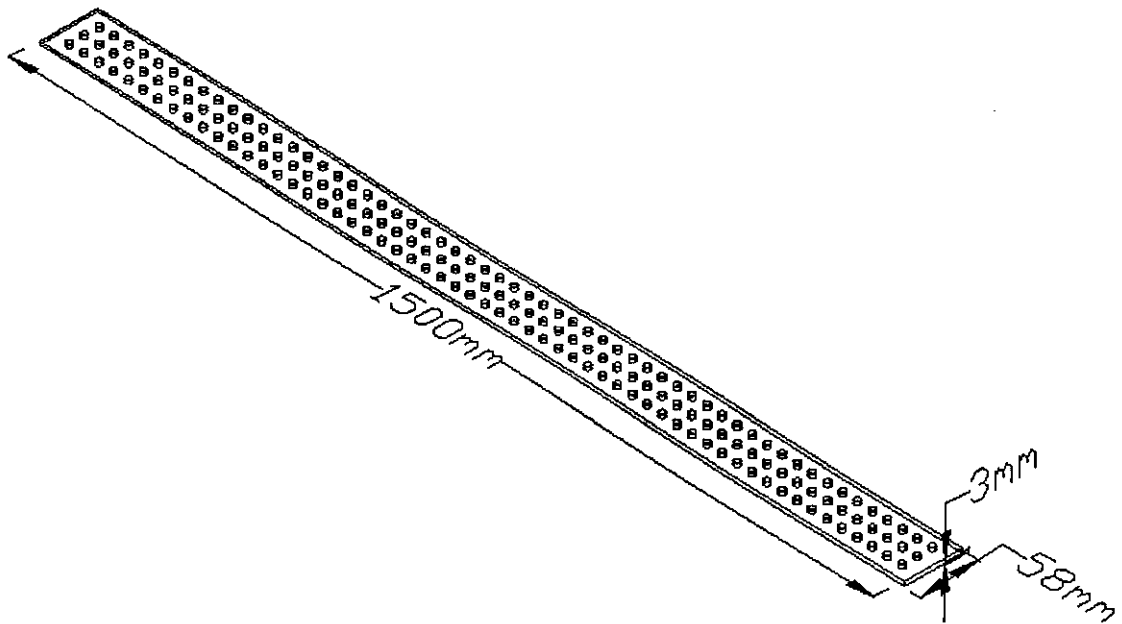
Isometric view of the perforated rectangular strip insert with dimensions.
